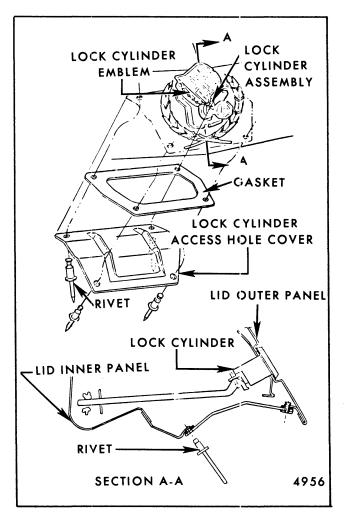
Lock Cylinder Access Hole Cover - Cadillac "E" Style
